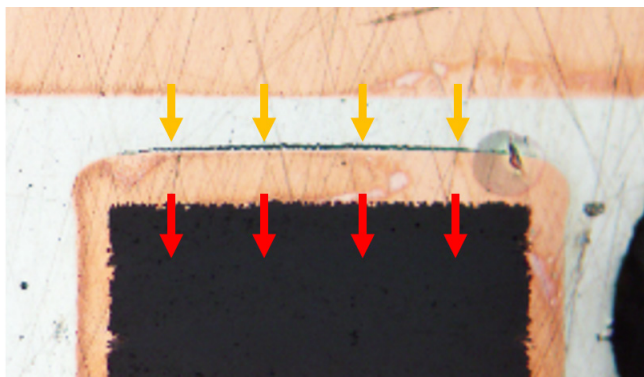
Schematic picture of the directional melting of a BGA solder joint.
